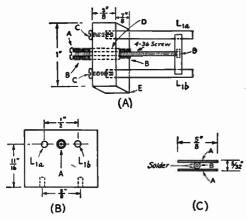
Detail drawing of the plate-line assembly used in the 420-Me, transmitter. A shows the lines and method of mounting in the polystyrene block, which is shown in detail at B. The shorting bar, for frequency adjustment, is shown at C. In view A parts B are 4-36 nuts which are tightened on shaft A, a 1½-inch 4-36 screw. Part D is a bushing which is embedded in the polystyrene block. It serves as a bearing. Lines Lis and Lib are 11/2 inches long.
